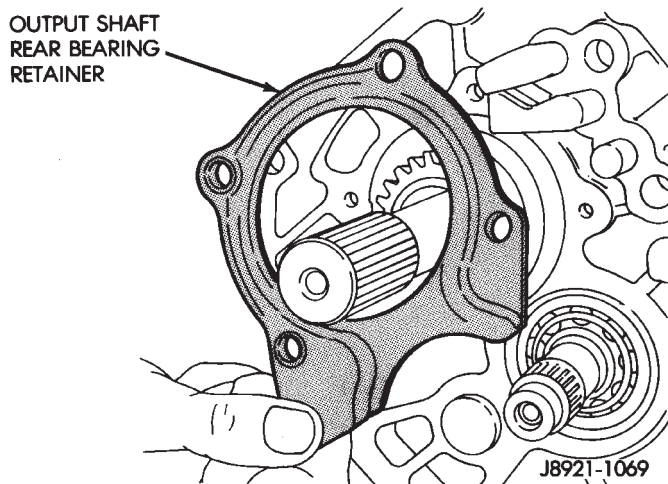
Remove Output Shaft Rear Bearing Retainer
